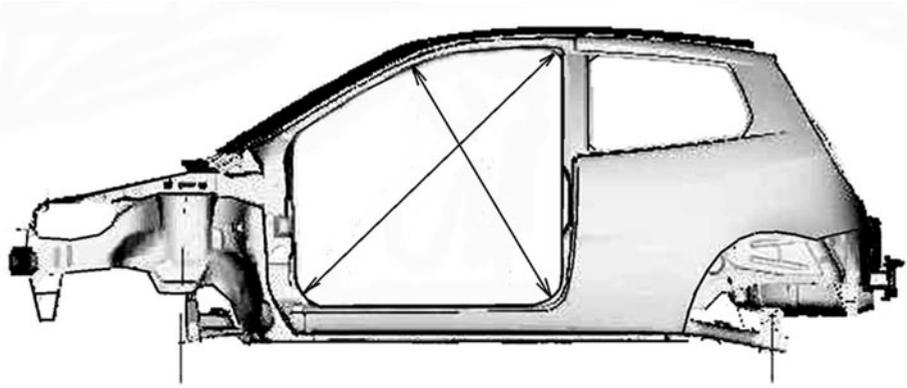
The layout of dimensional measurement of door opening deformation in body torsion test.
